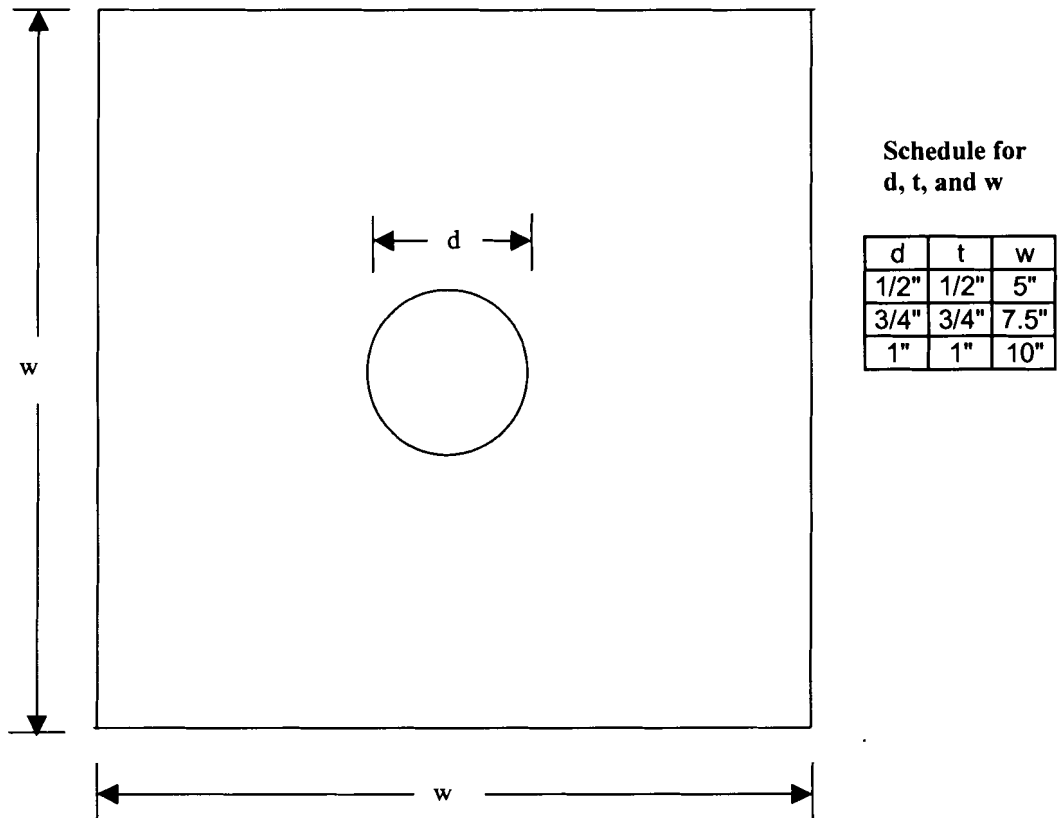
Single Bolt Test Specimen and Fixture Schematic
